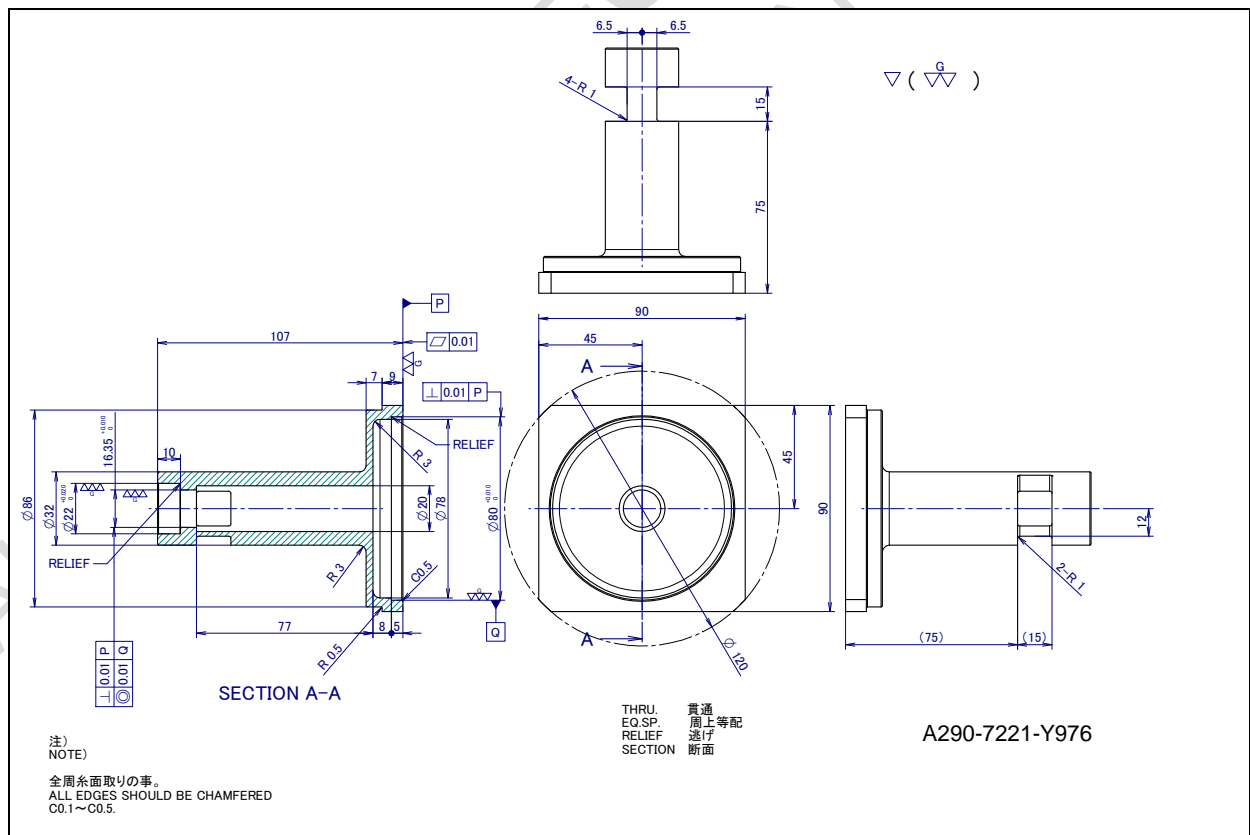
(f) Mounting fixture for gear of J3-axis motor
